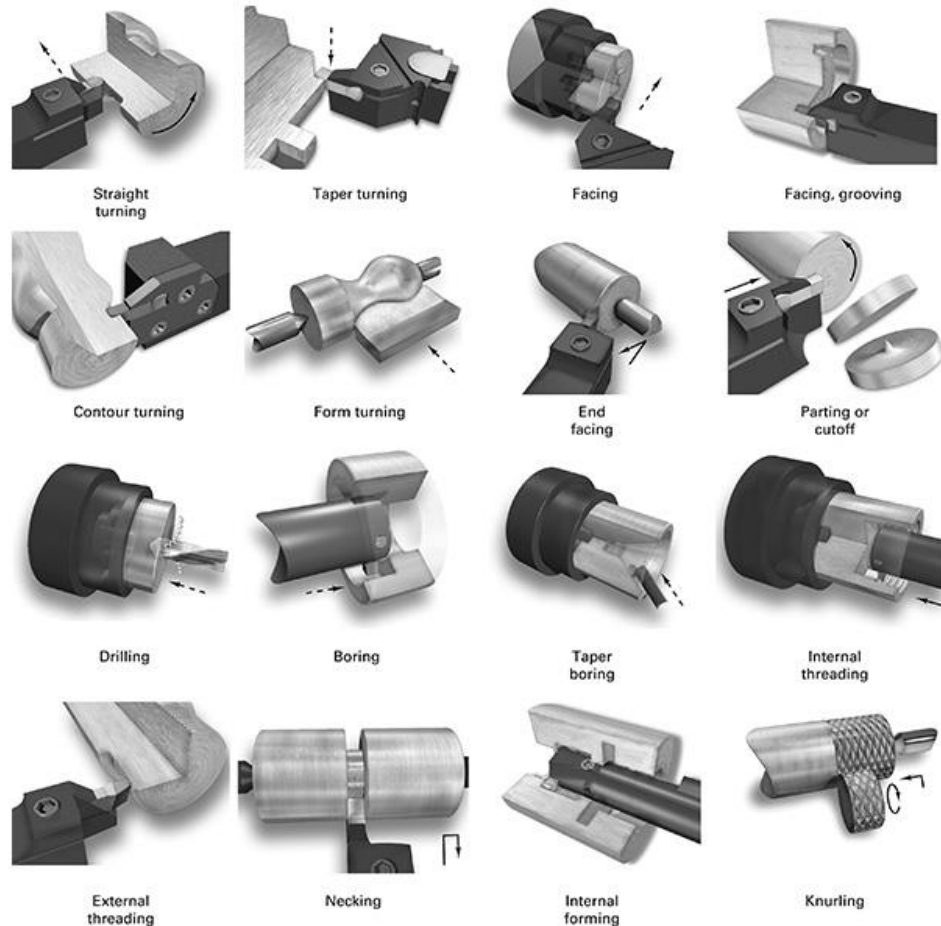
Basic turning machines can rotate the work and feed the tool longitudinally for turning and can perform other operations by feeding transversely. Depending on what direction the tool is fed and on what portion of the rotating workpiece is being machined, the operations have different names. The dashed arrows indicate the tool feed motion relative to the workpiece.
